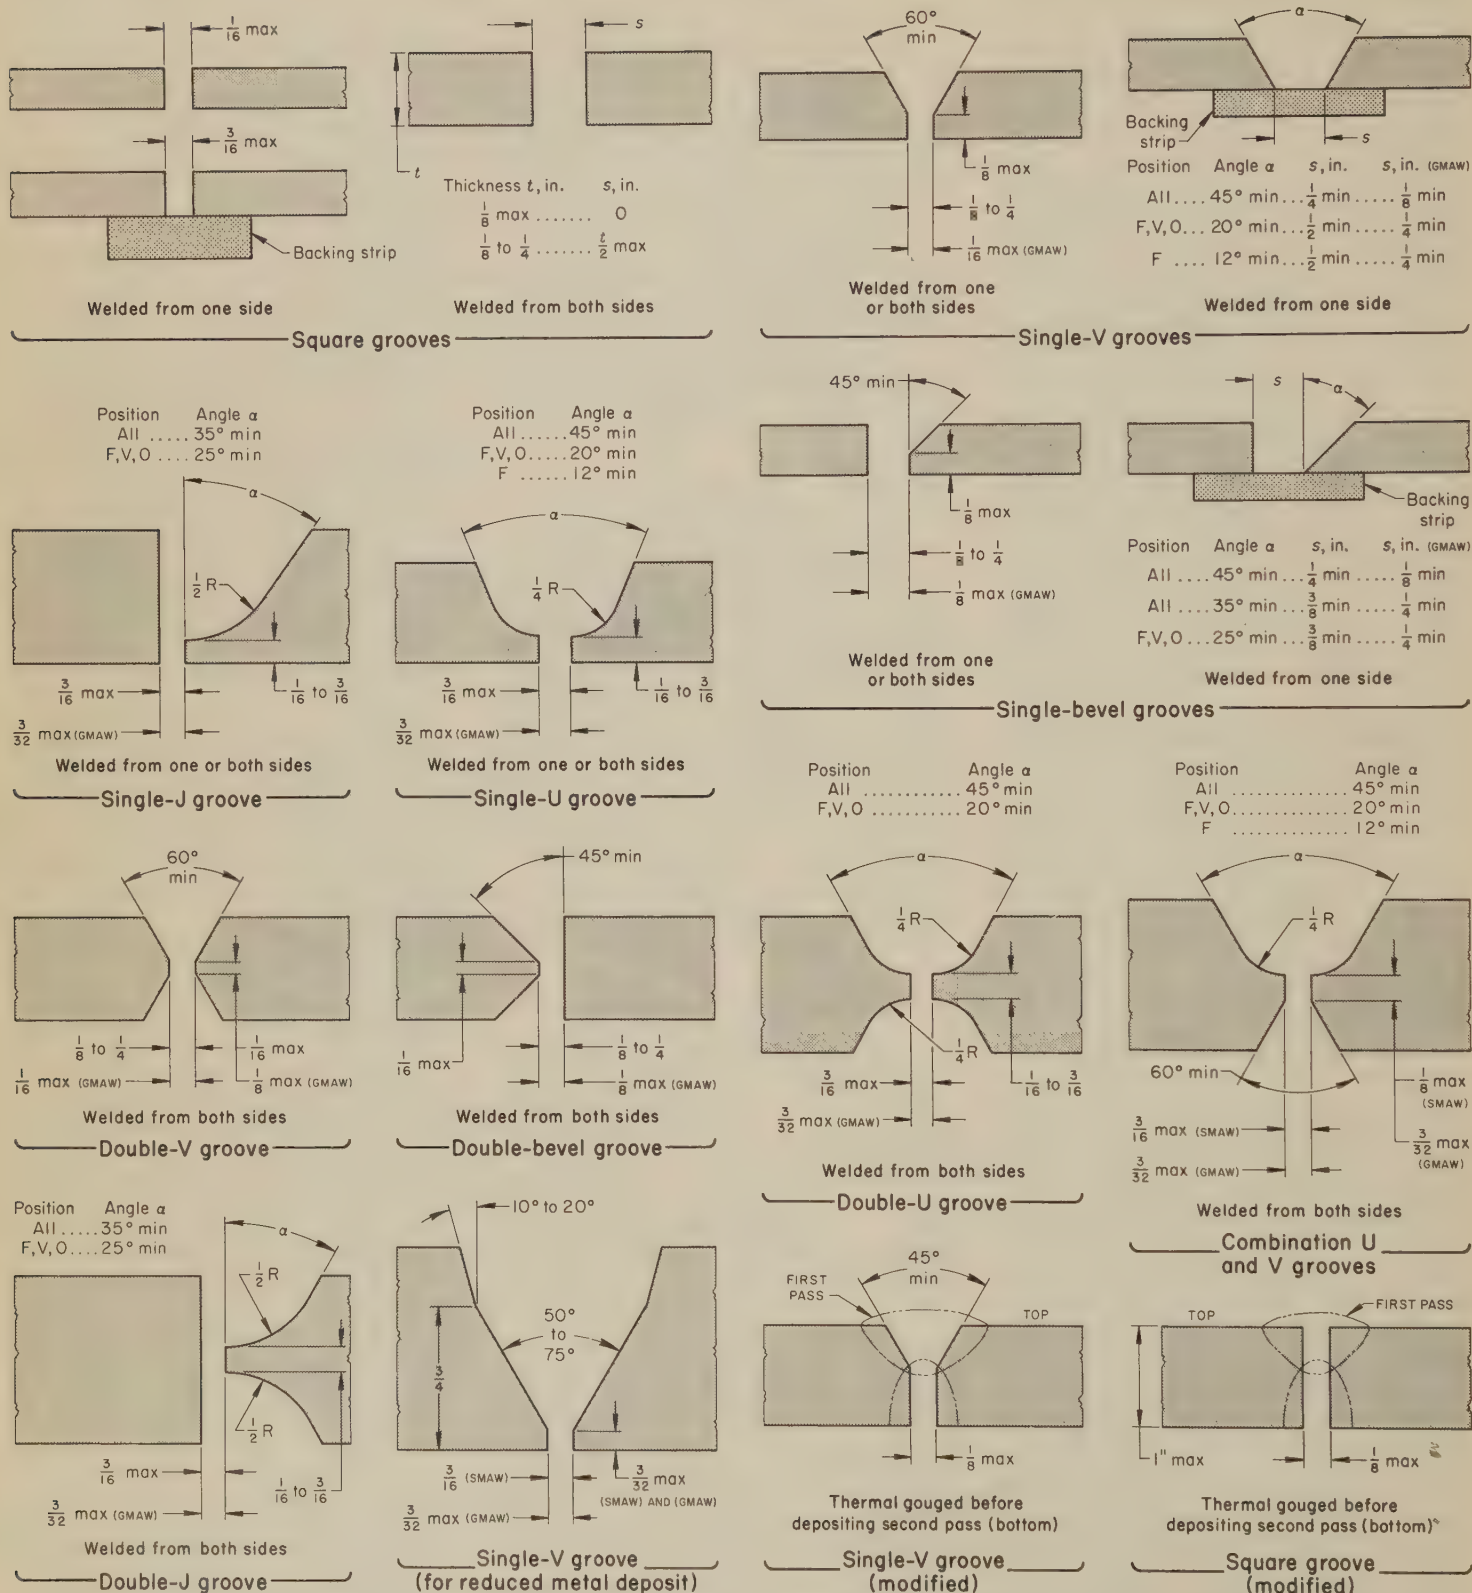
Recommended proportions of grooves for butt joints made by shielded metal-arc, gas metal-arc, gas tungsten-arc, flux-cored arc and gas welding (except pressure gas welding). Dimensions that apply to gas metal-arc welding only are noted.
